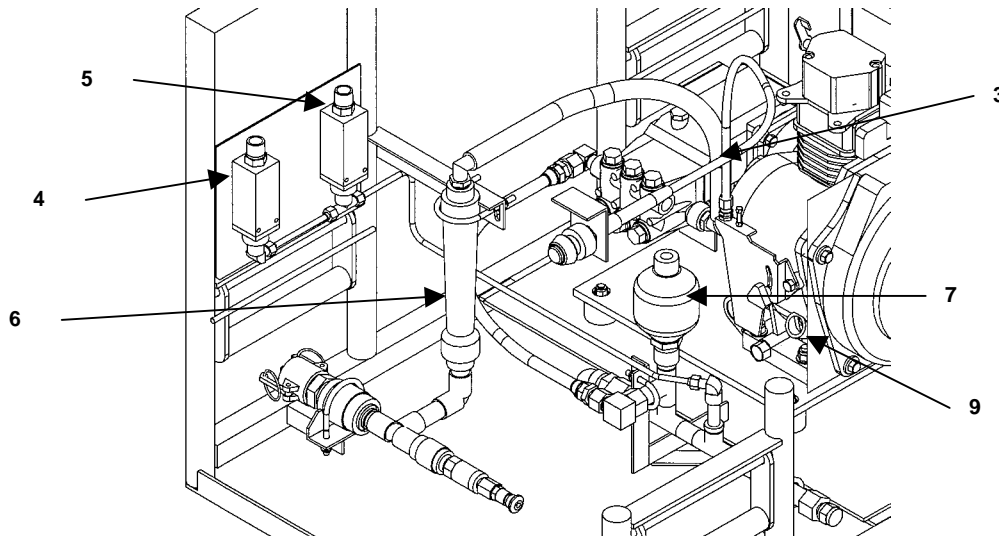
Switches, Meter, Dampener, and Throttle on High-Pressure Pump Module.
